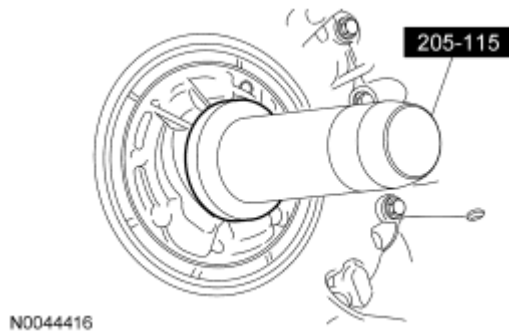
Installing Torque Converter Hub Seal Using Special Tool (205-115)
